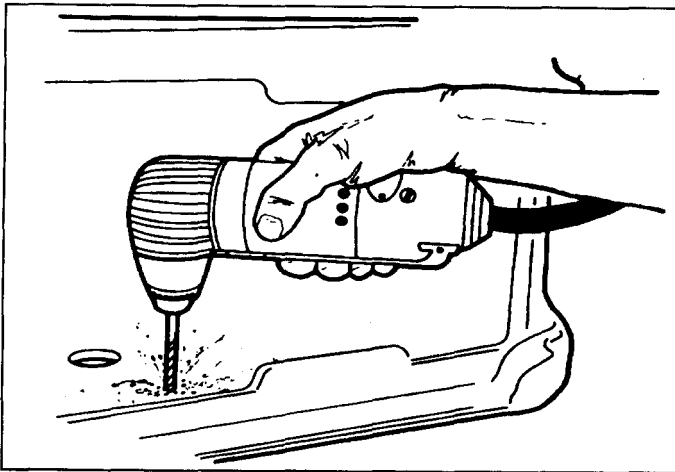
Hand drilling operation in confined space using the 90° angle drill.
